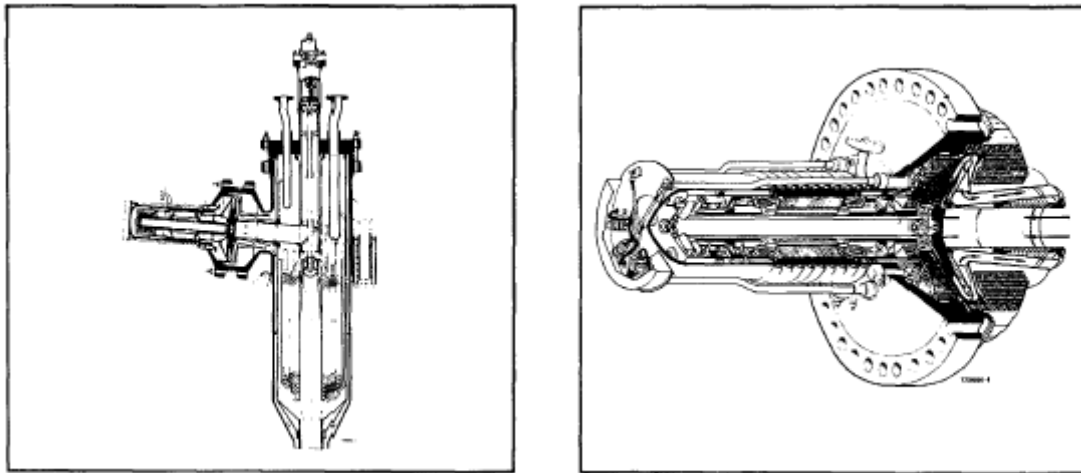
DRAGON Coolant Circulator Arrangement and Sectional View
